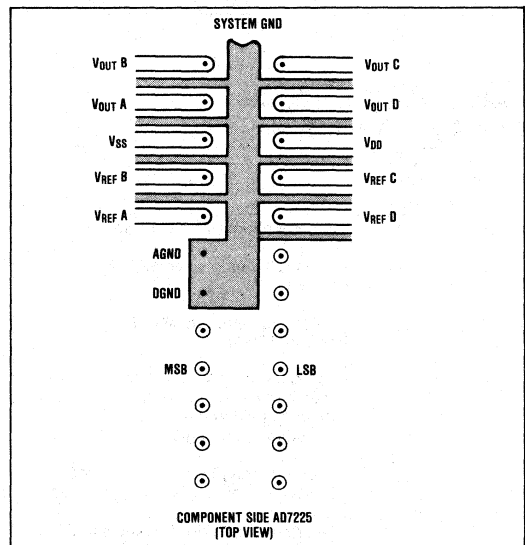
Suggested AD7225 PCB Layout for Minimizing Crosstalk
